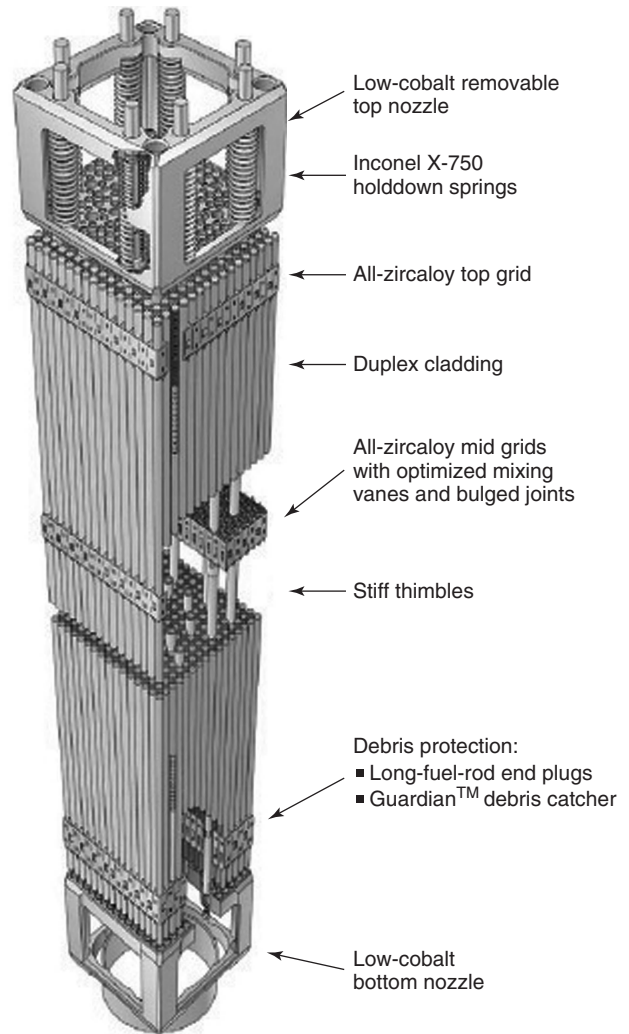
Westinghouse 15 × 15 PWR fuel assembly. Source: <http://me1065.wikidot.com/fuel-assemblies-in-nuclear-reactors>.
